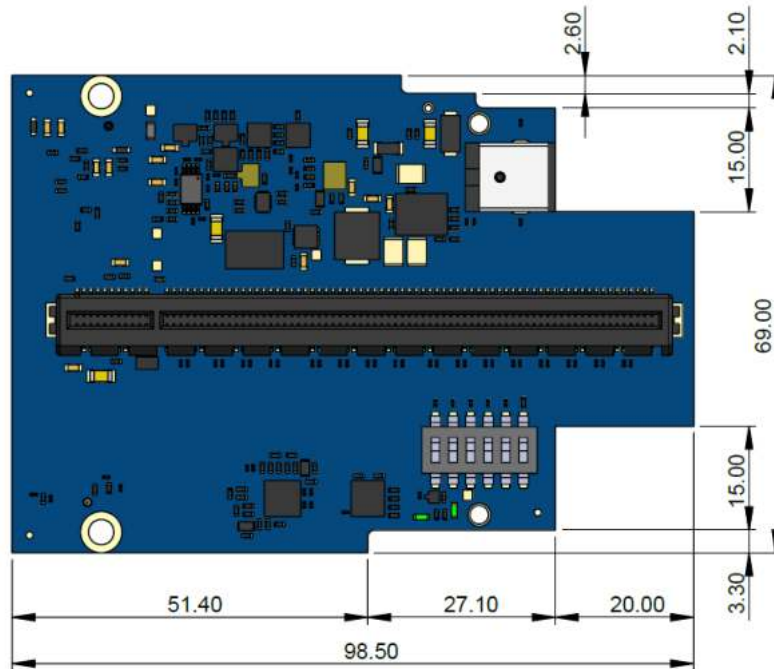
FMC+ PCIe x16 Module Mechanical dimension – Top View
